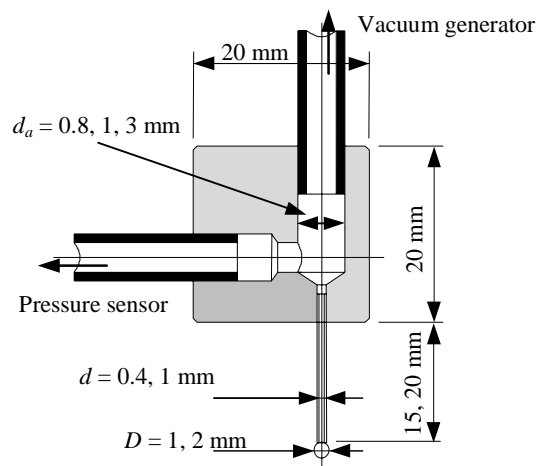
Cross sectional drawing of the first prototype of the pneumatic ball probe
